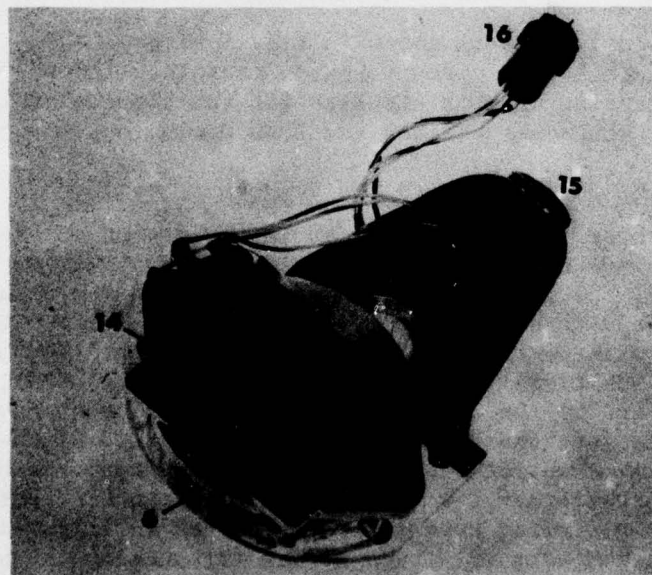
Heater/transformer assembly. (6) transformer, (14) heater, (15) cam for operation of microswitches inside part (4) of Fig. 4, (16) electrical connector which plugs into connector in part (4).
